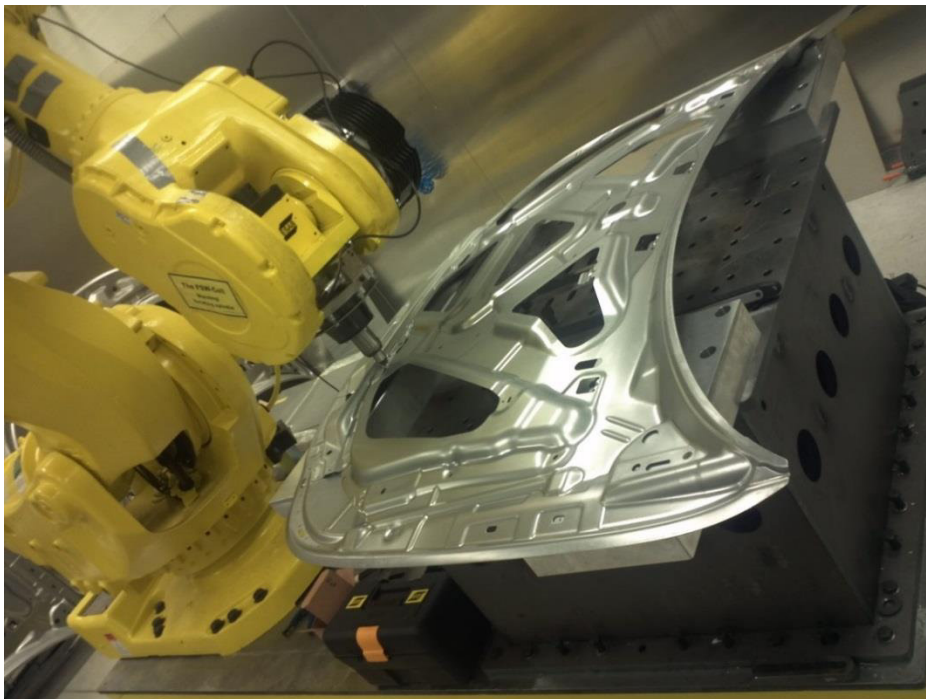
Robotic FSW of a multi welding part (Source: (Backer et al., 2012)).
